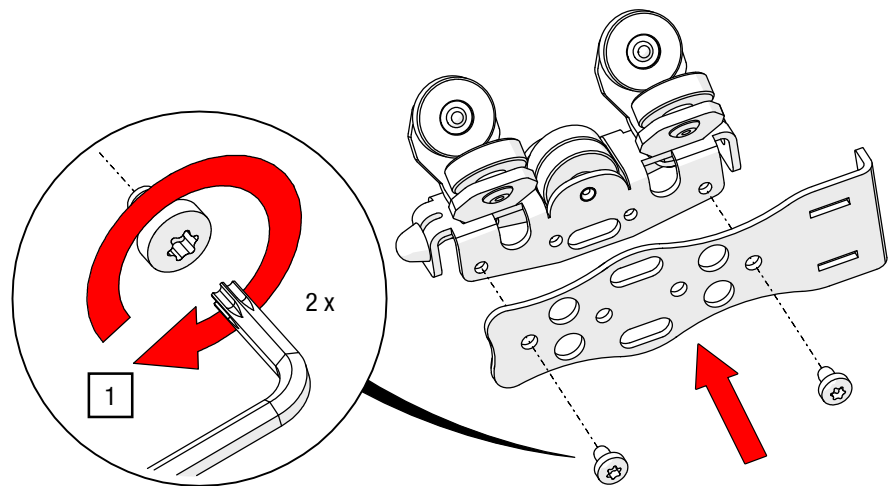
Conversion of master runner with overlap arm – Mount side plate
